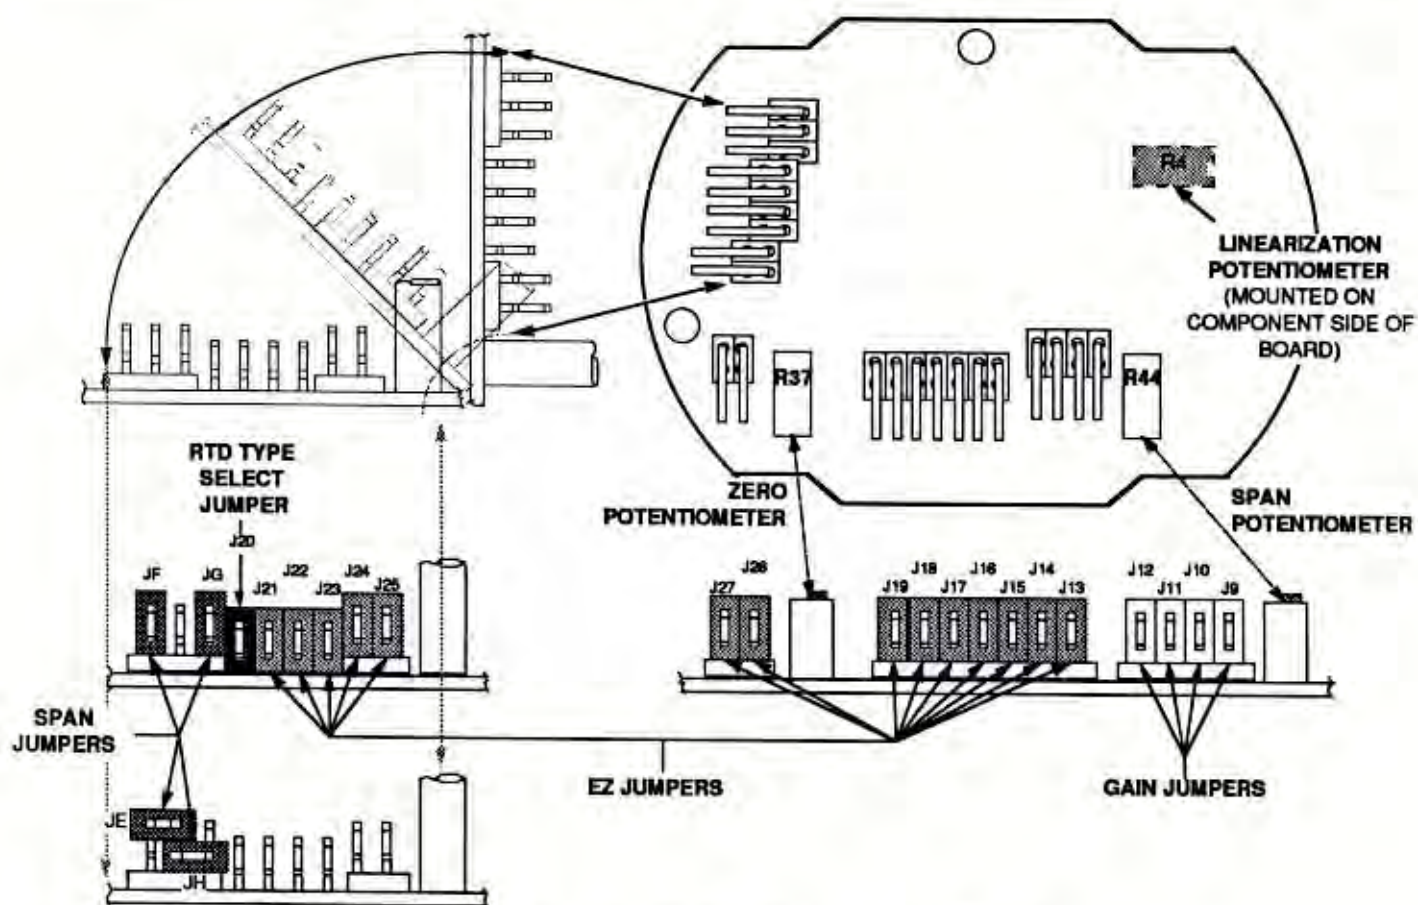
Jumpers and Pots, the HP-style EP-RBX Printed Circuit Board 1
